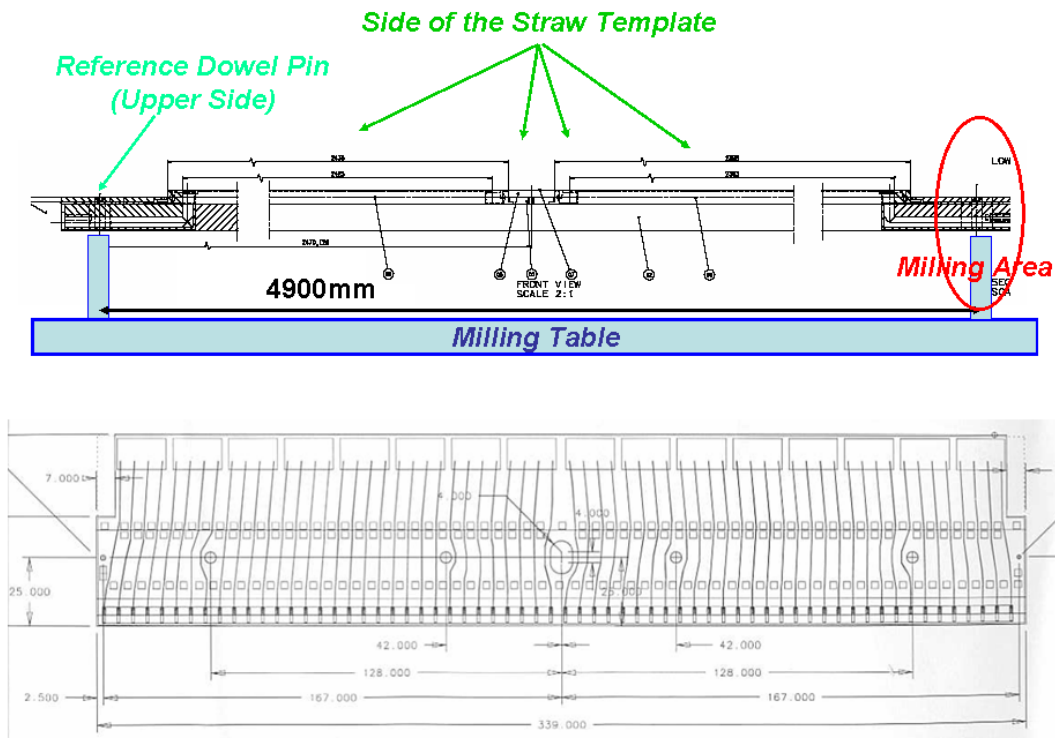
Side view of the Milling Setup (top) and Lower Feed-Through Board Layout (bottom).
